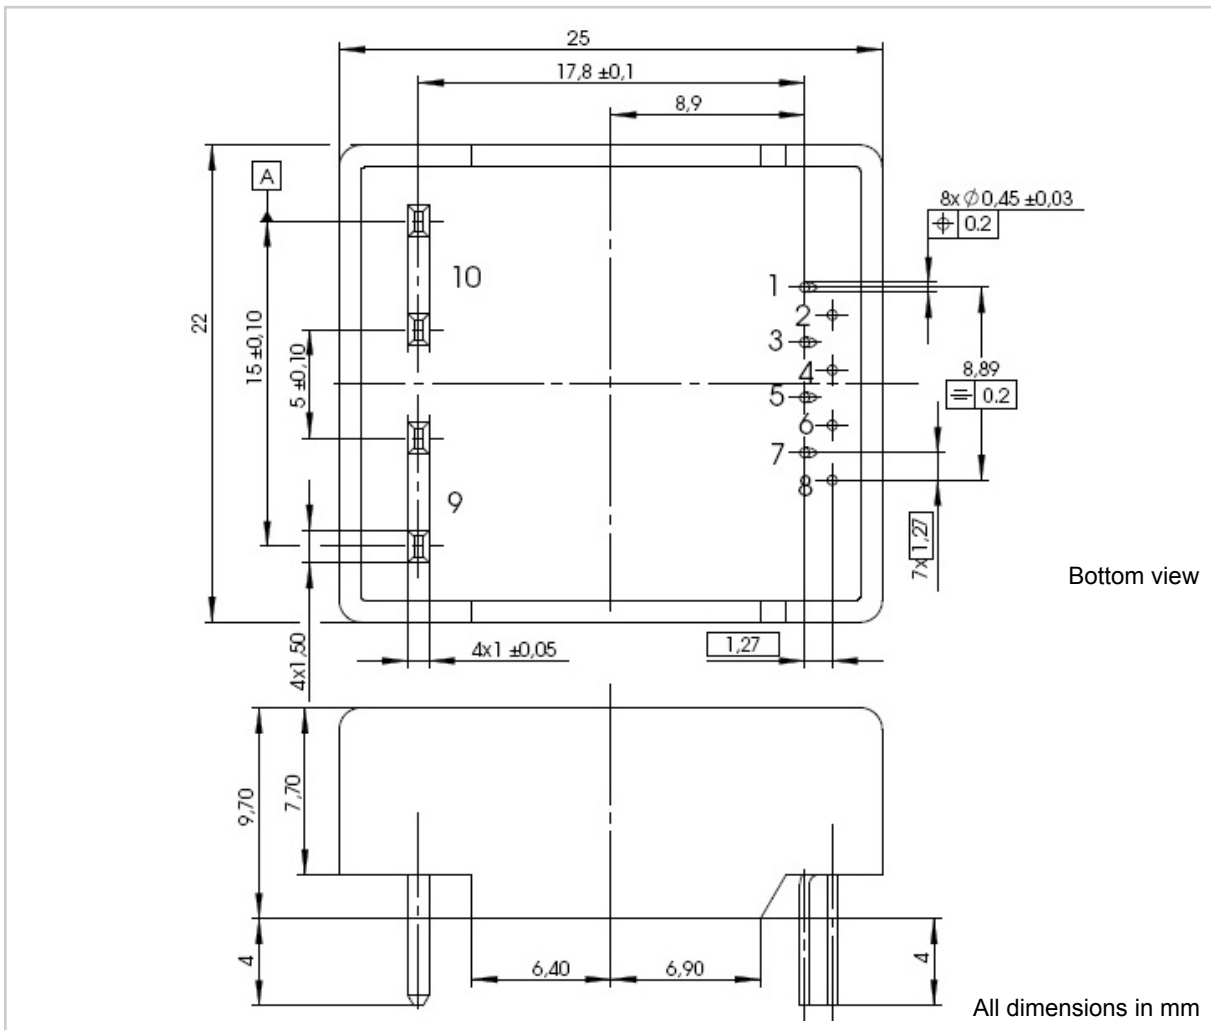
Package outline of THT-housing (medium size). Tolerance  $\pm 0.2\text{ mm}$  unless otherwise specified.
